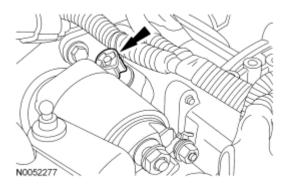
Identifying Wire Terminals From Starter Courtesy of FORD MOTOR CO.
